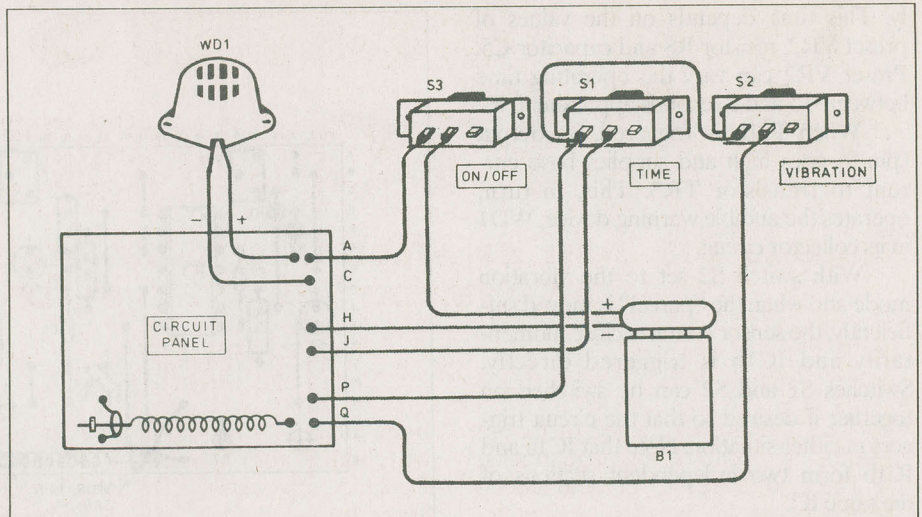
Interwiring from the slide switches, buzzer and battery to the component side of the circuit board.
